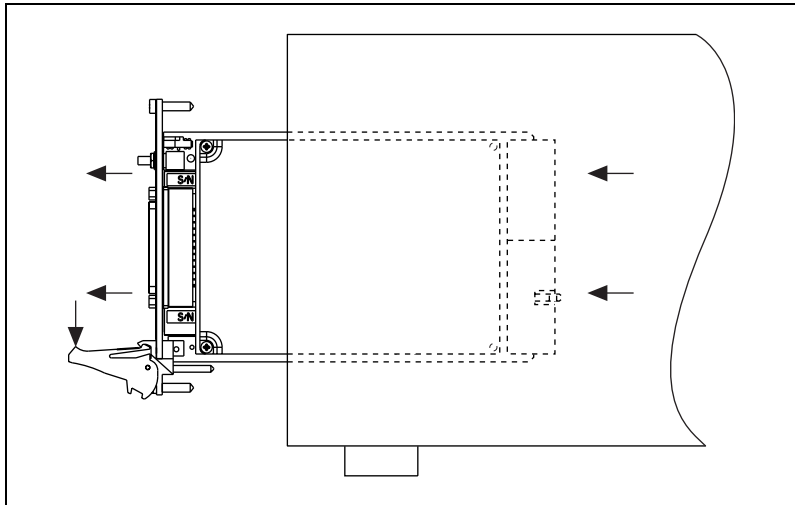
Injector/Ejector Handle Position Before Device Removal
